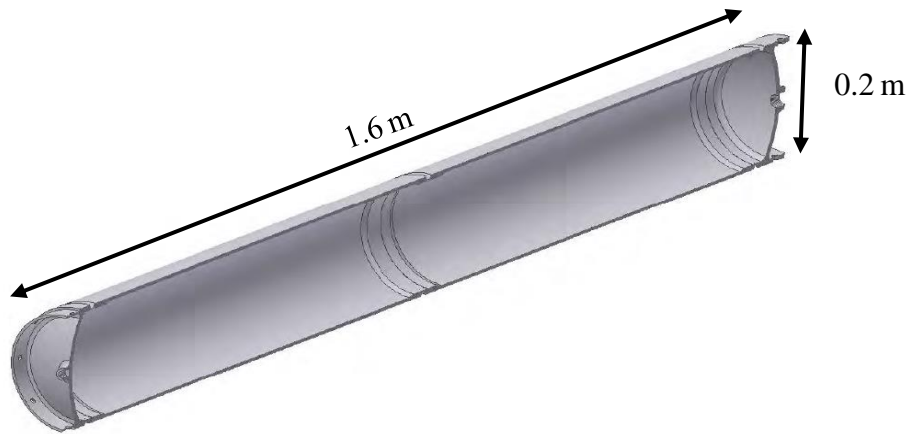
Cross-sectional View of the Oxidiser Tank from the P1A Hybrid Rocket [8]
